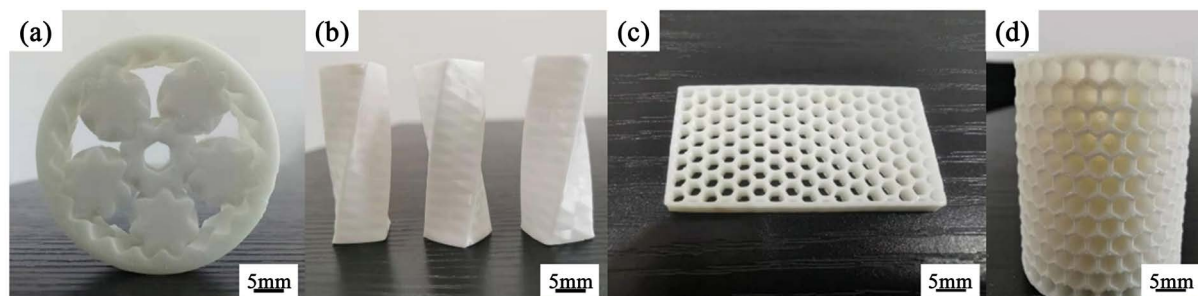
Complex zirconia parts fabricate by 3D printing (a) Gear; (b) Twisted hollow structure; (c) Rectangular honeycomb; (d) Cylindrical honeycomb
